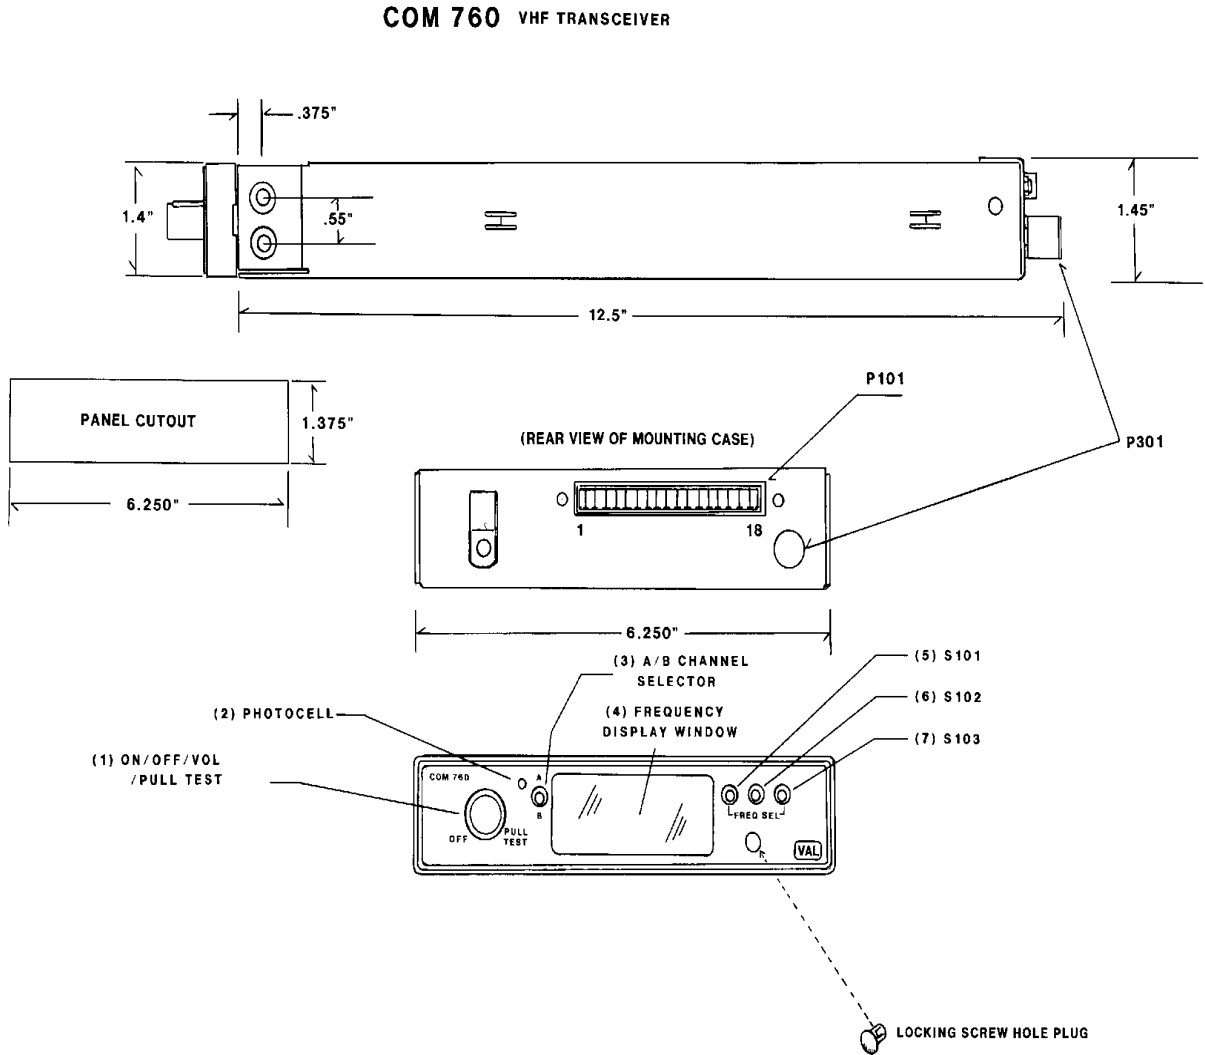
COM 760 OUTLINE AND MOUNTING DIMENSIONS
